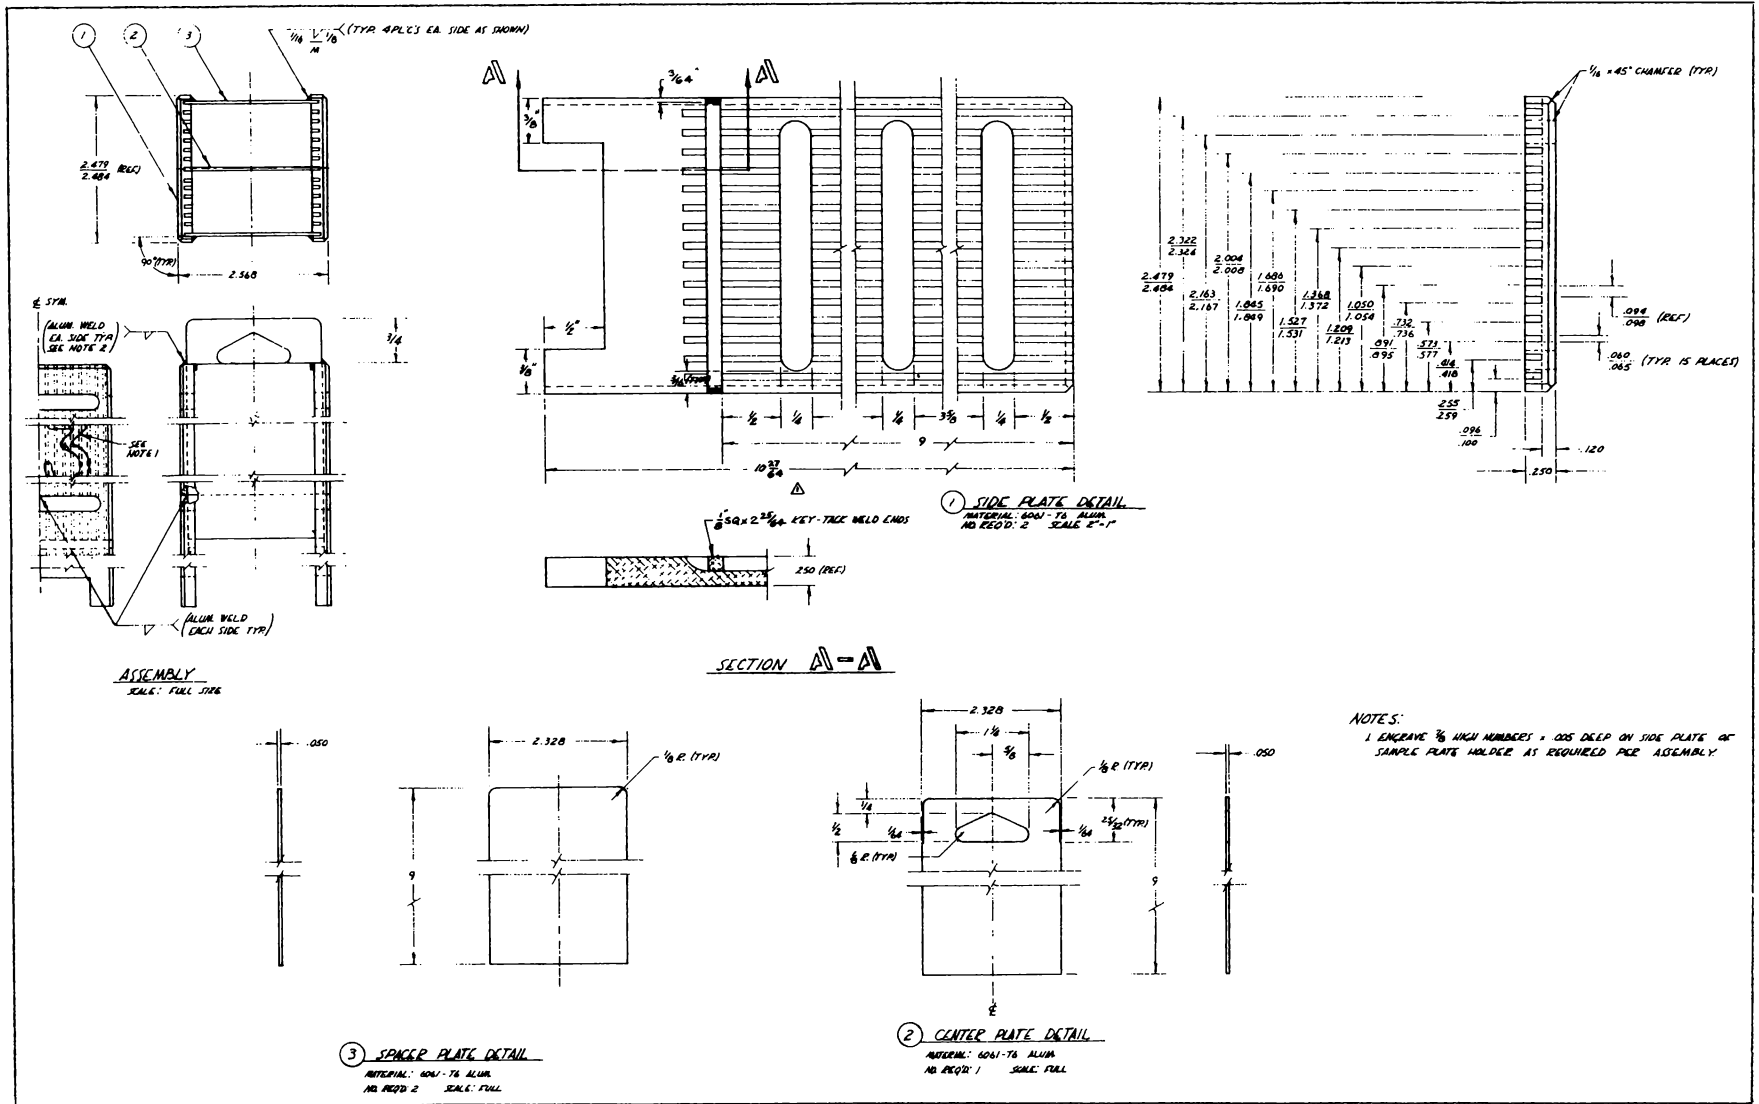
PAED-59 experiment ATR sample fuel plate irradiation 9-inch fuel plate holder assembly and details.
